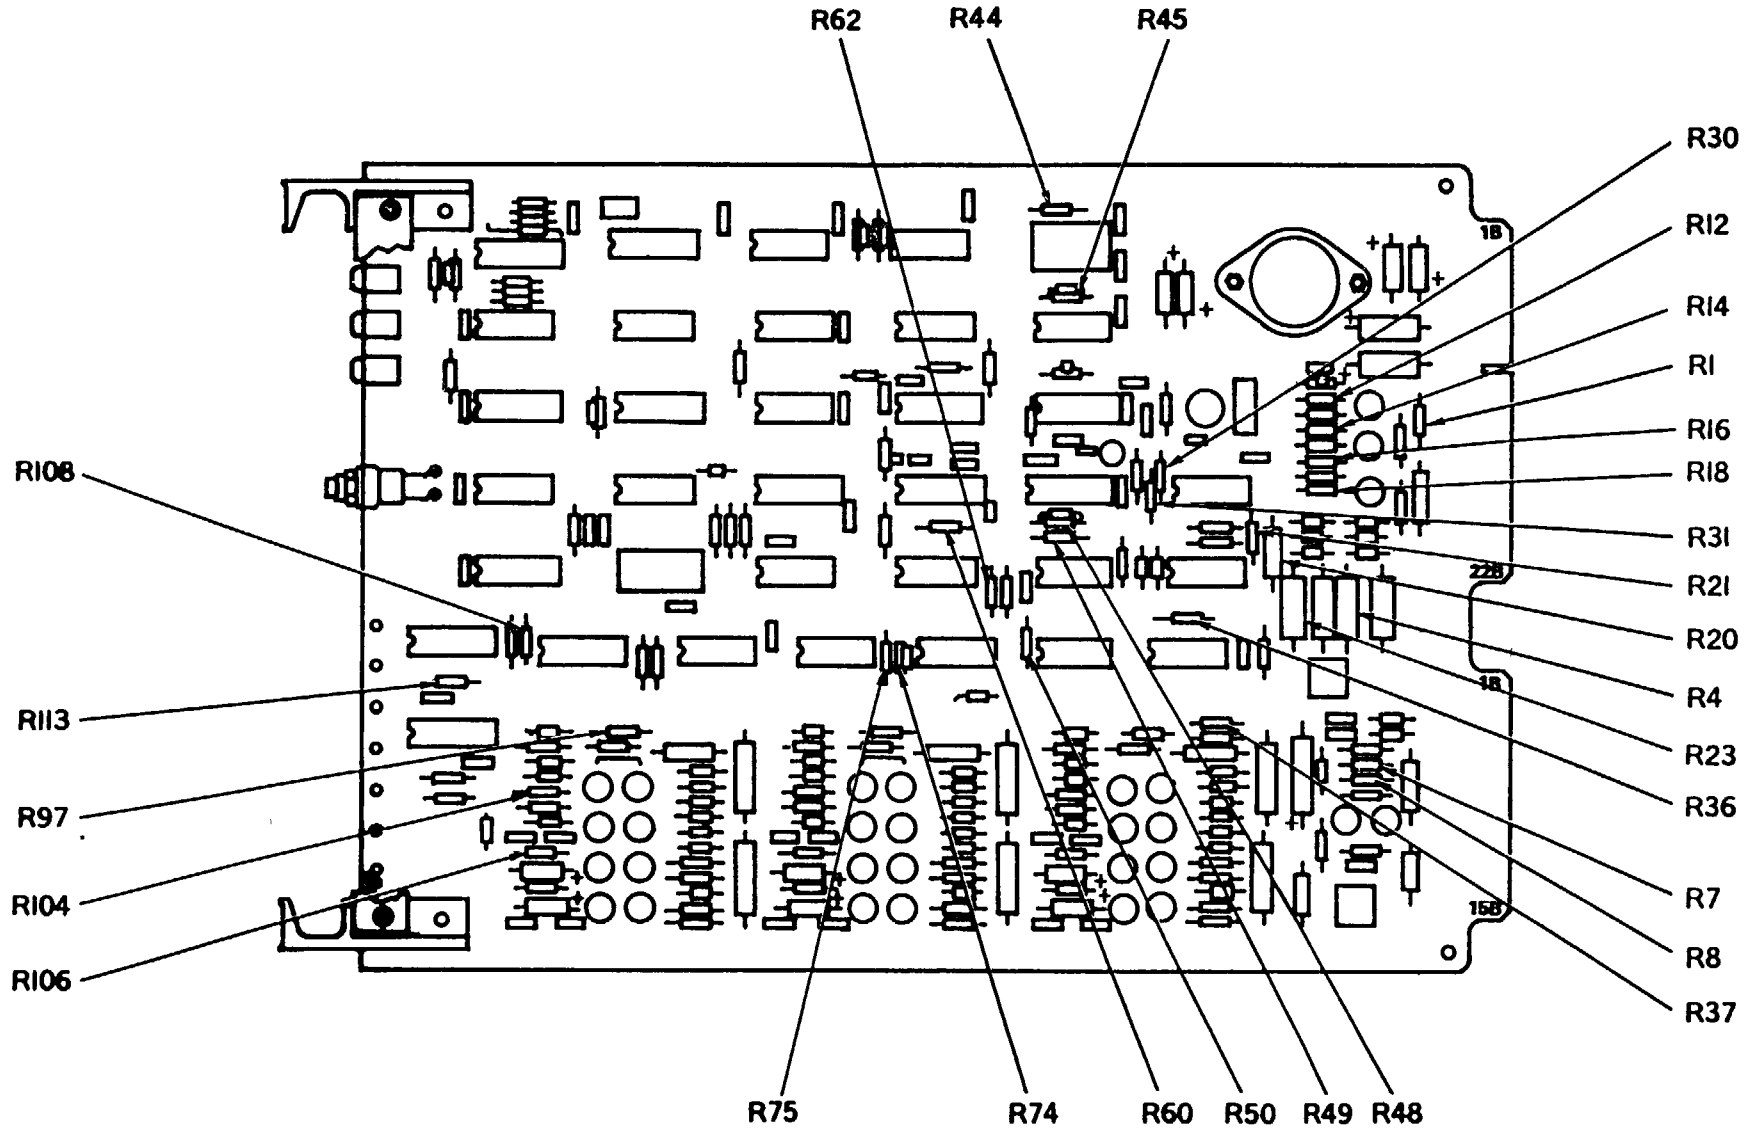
DRIVER unit parts location diagram (sheet 1 of 14) DVR02.
